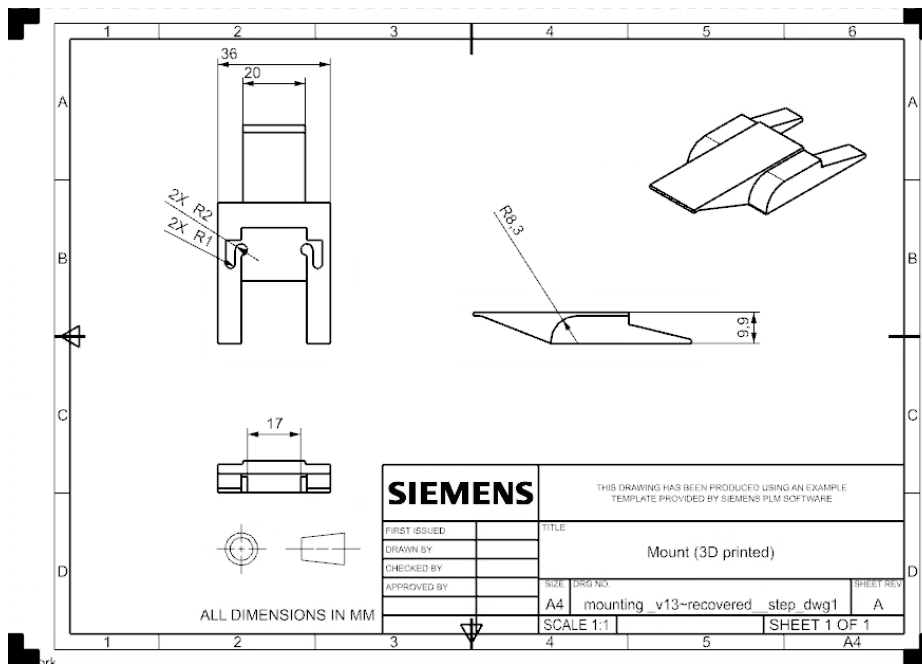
Engineering Drawing of Mount(3D Printed)
